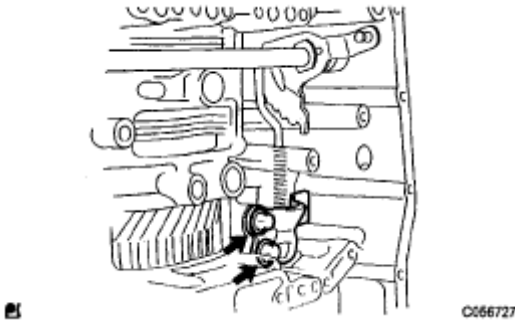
Locating Parking Lock Pawl Bracket Bolts
